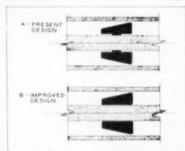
Means for guiding valve lock in distribution system of assembly machine before and after design change.
